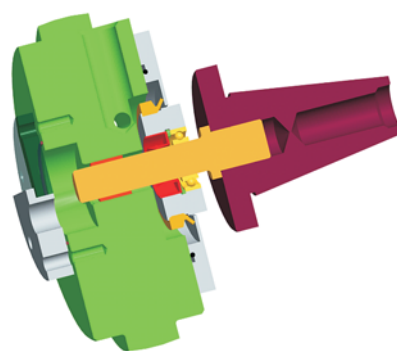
The principle scheme of Tribotestor M'06 testing machine
